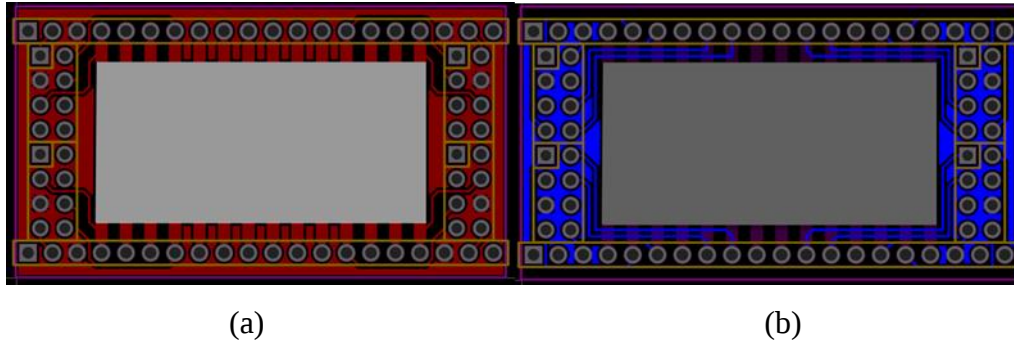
PCB of the package. (a) Top Layer, (b) Bottom Layer
